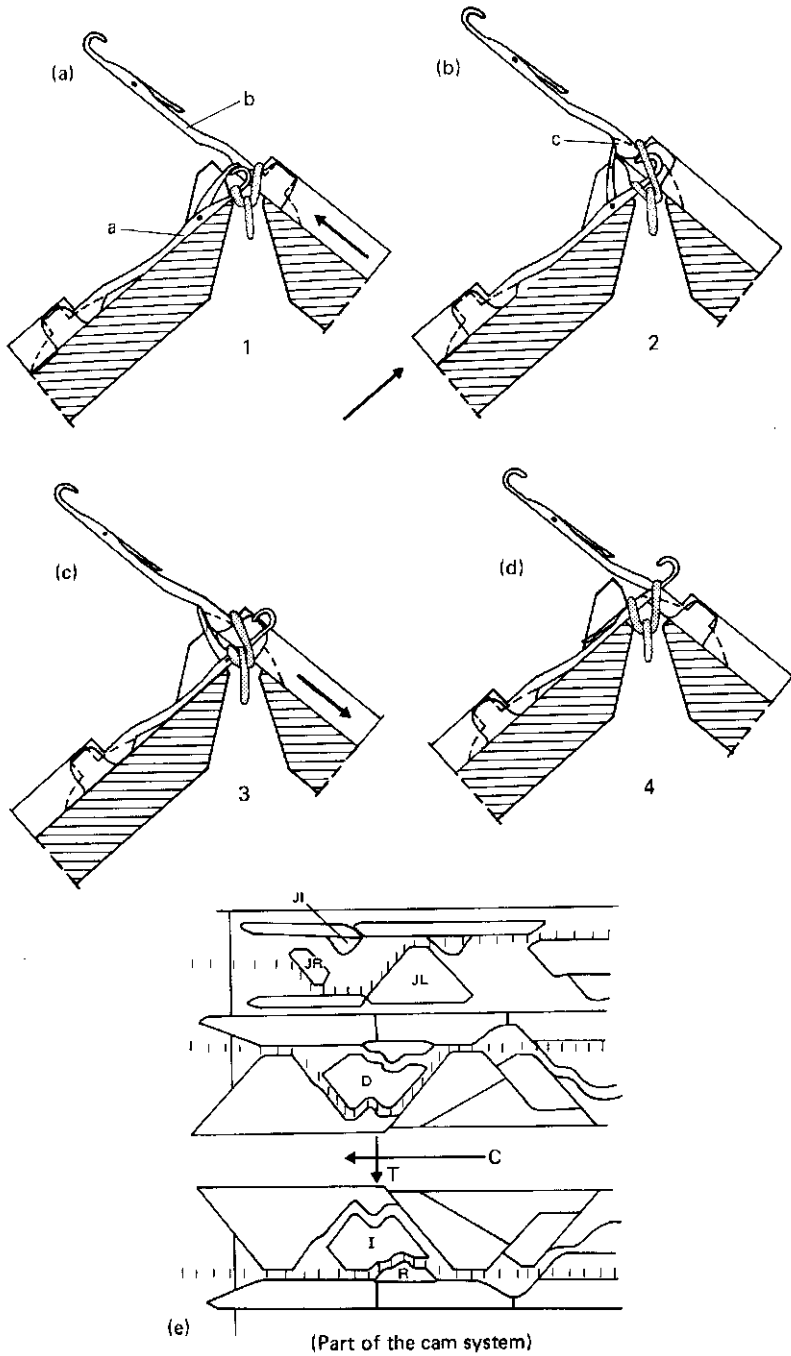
Rib loop transfer on a modern V-bed machine.
